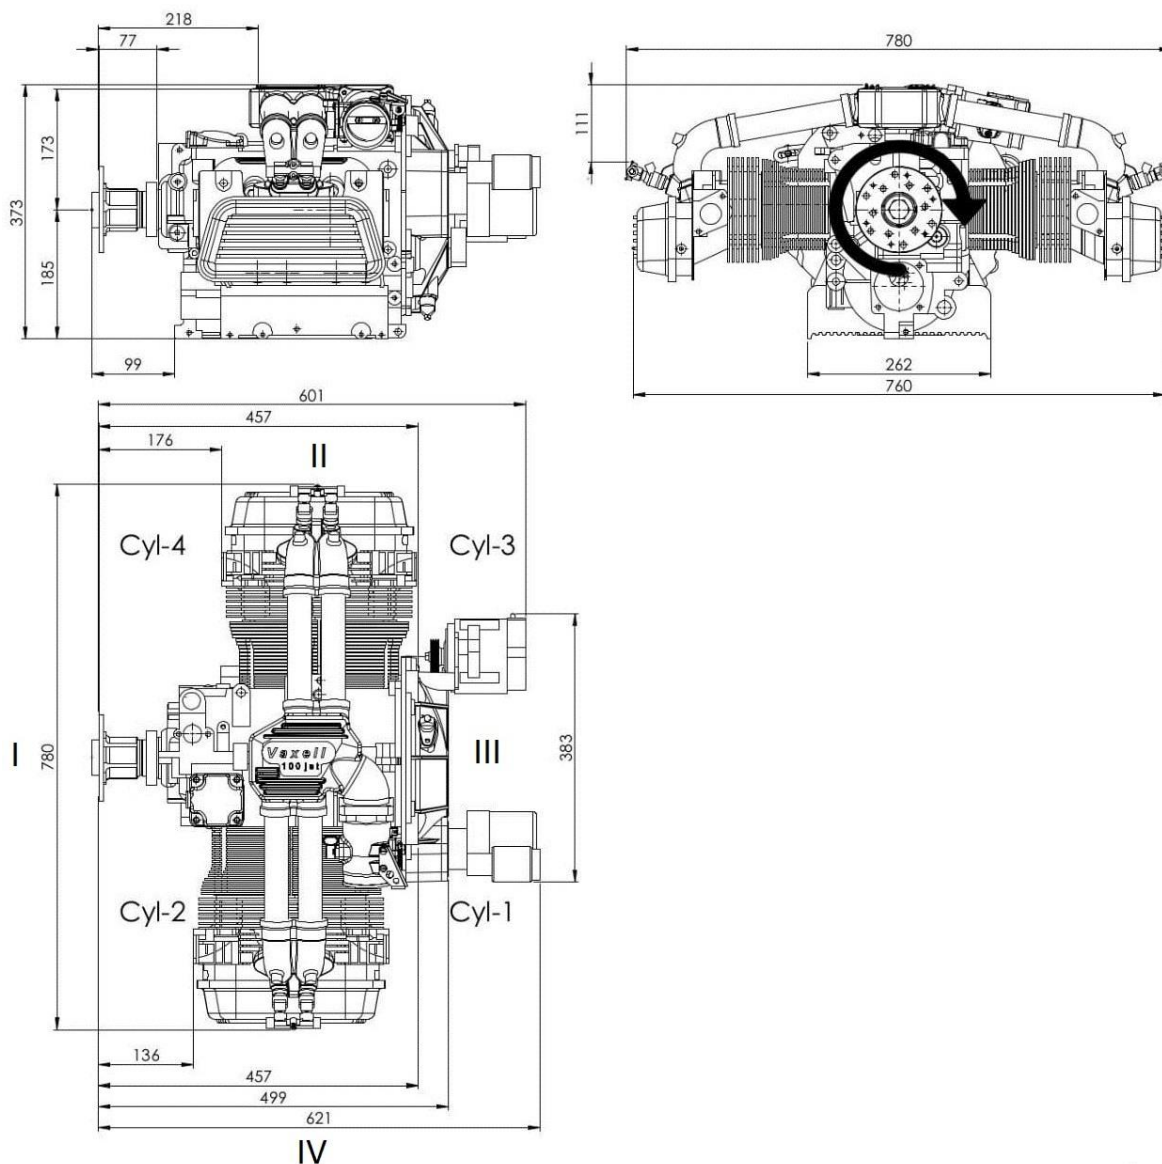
Overall dimensions, cylinder numbering and propeller rotation direction.
